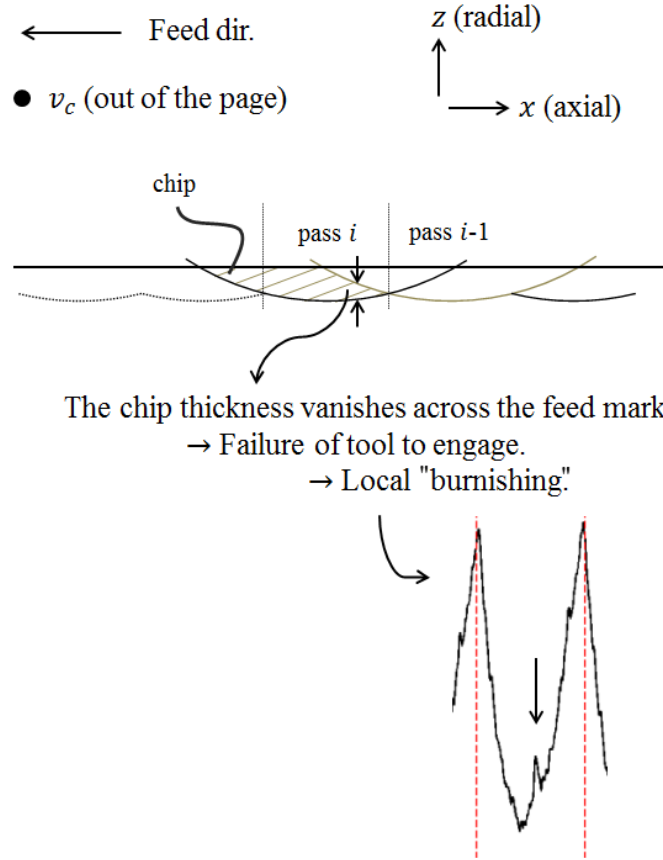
Illustration of local, sub-feed-mark failure of the cutting tool to engage the workpiece material, as a result of the minimum chip thickness phenomenon and the geometrical situation of turning with fully round engaged tool nose profile.
